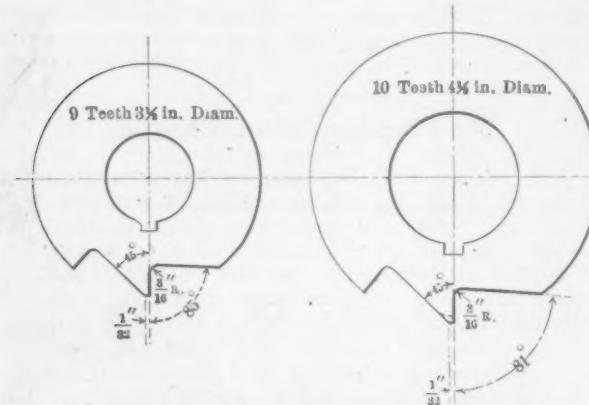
The Form of the Spiral Milling Cutters Now Used by the Cincinnati Milling Machine Company, Cincinnati, Ohio.
